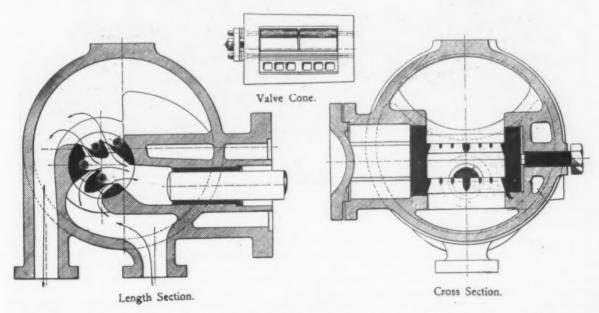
Sectional Views and Valve Detail of a "Spherical" Boller Feed Pump Fitted with Gutermuth Valves.
